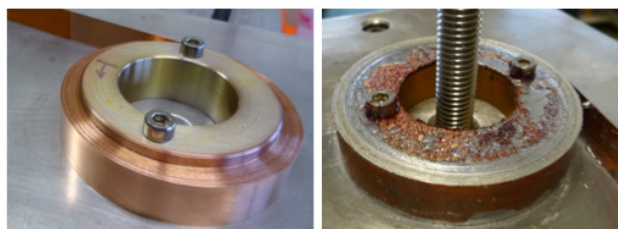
a) Solenoid coil winding, b) Soldering paste deposit.
